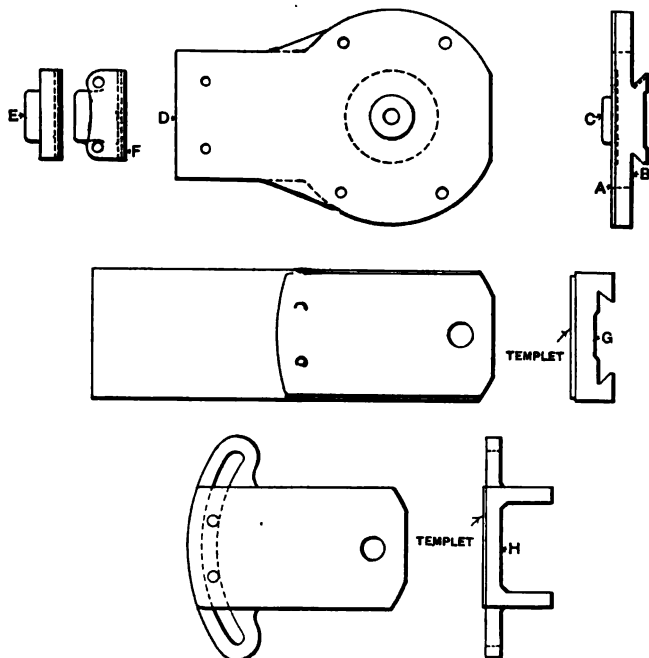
Sheet-Iron Templates for Laying out Planer Cross-rail Members
